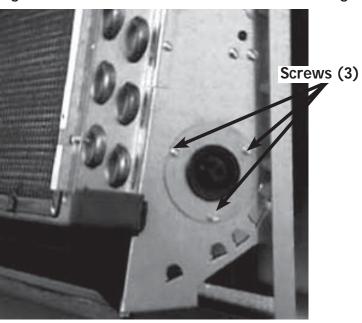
WSP/WHP Rev. C Blower Wheel Bearing
